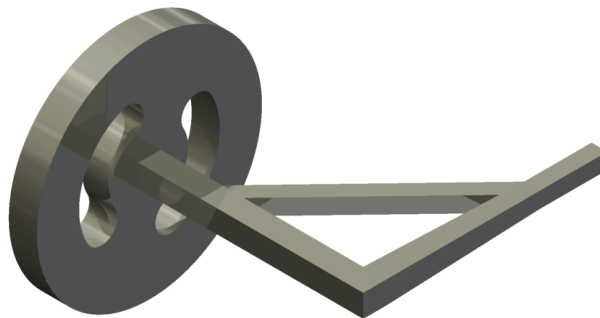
Rendering of the Secondary Adapter Plate for Horizontal Fatigue Testing
